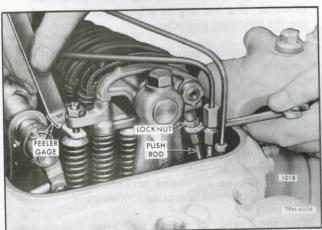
Adjusting Valve Clearance (Spring-Loaded Valve Bridge)
